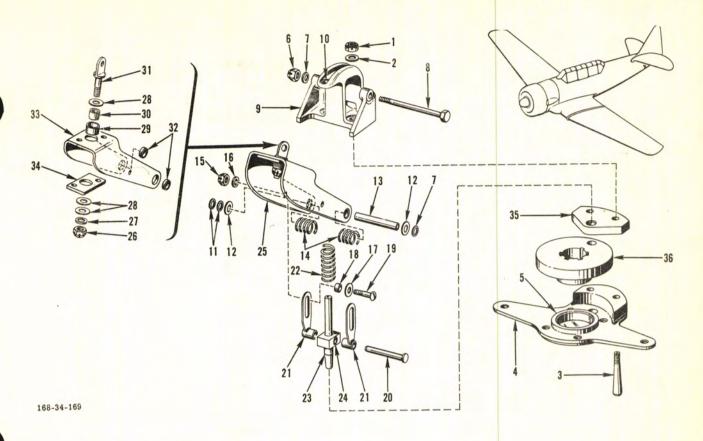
9 -	TAIL	WHEEL	DECLUTCHING	HEAD	ASSEMBLY
